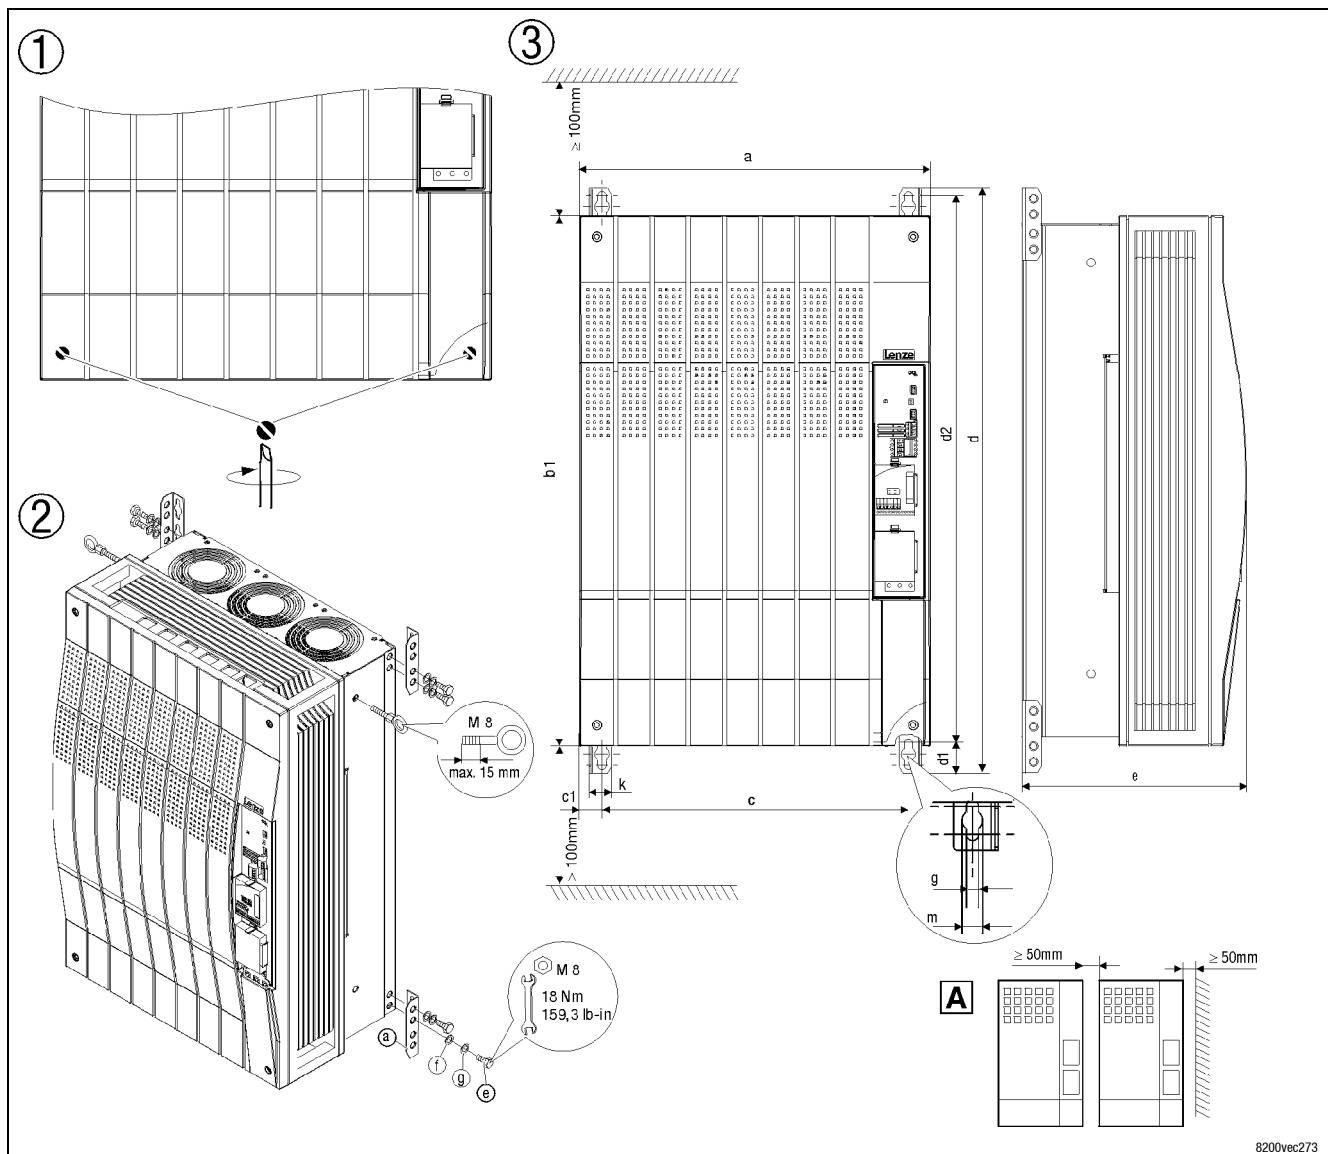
Standard mounting with mains choke 75 ... 90 kW
